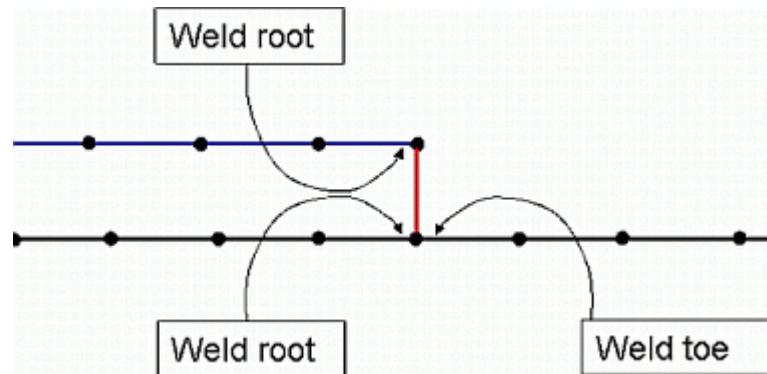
Weld toe and root calculation points and surfaces (weld top) for overlap weld—two-element method
